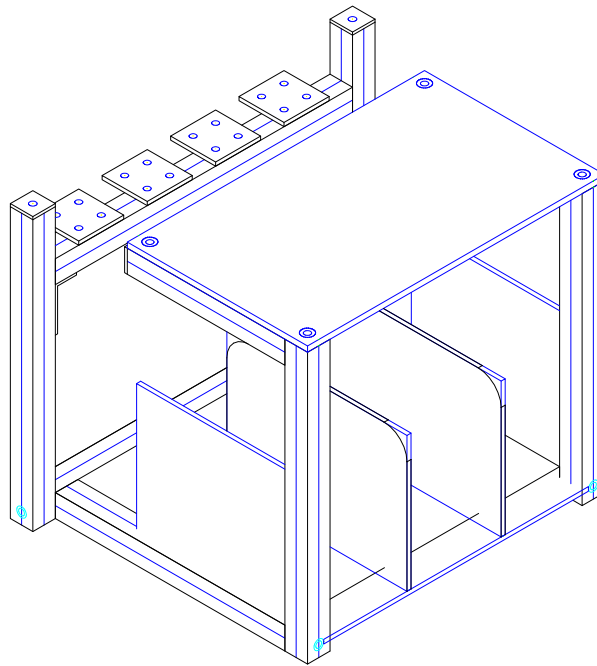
Thee Dimensional view of the acoustic radar final frame design.
